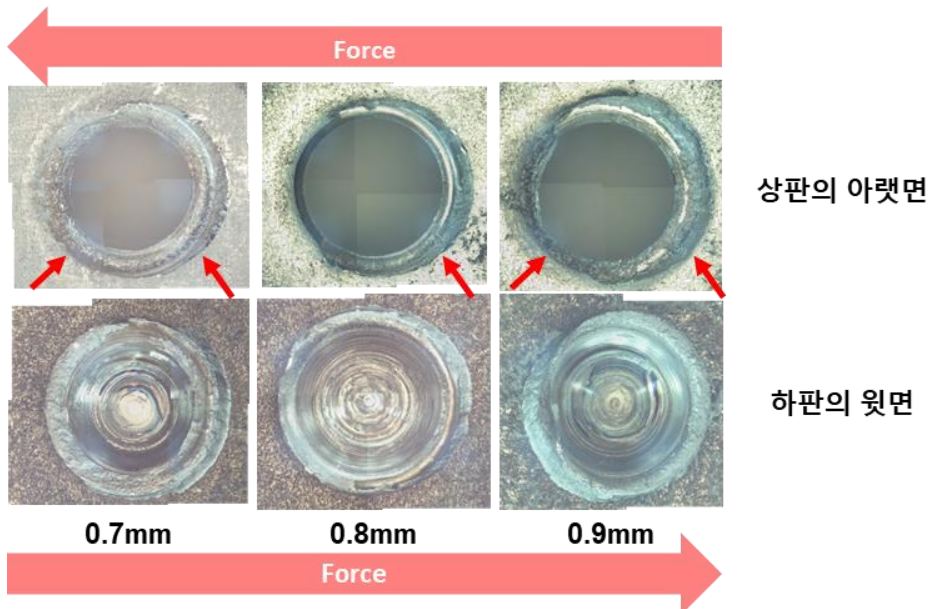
Fracture surface OM panorama with plunge depth of 0.7mm, 0.8mm, 0.9mm after tensile shear test
